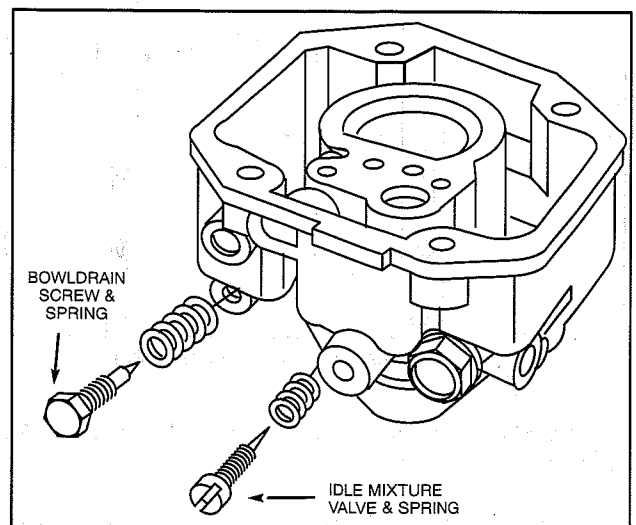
Installing Idle Mixture Valve And Drain Screw
